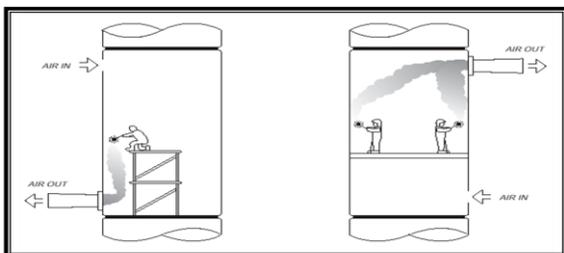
Suggested ventilation methods for downhand welding or cutting and for uphand welding
